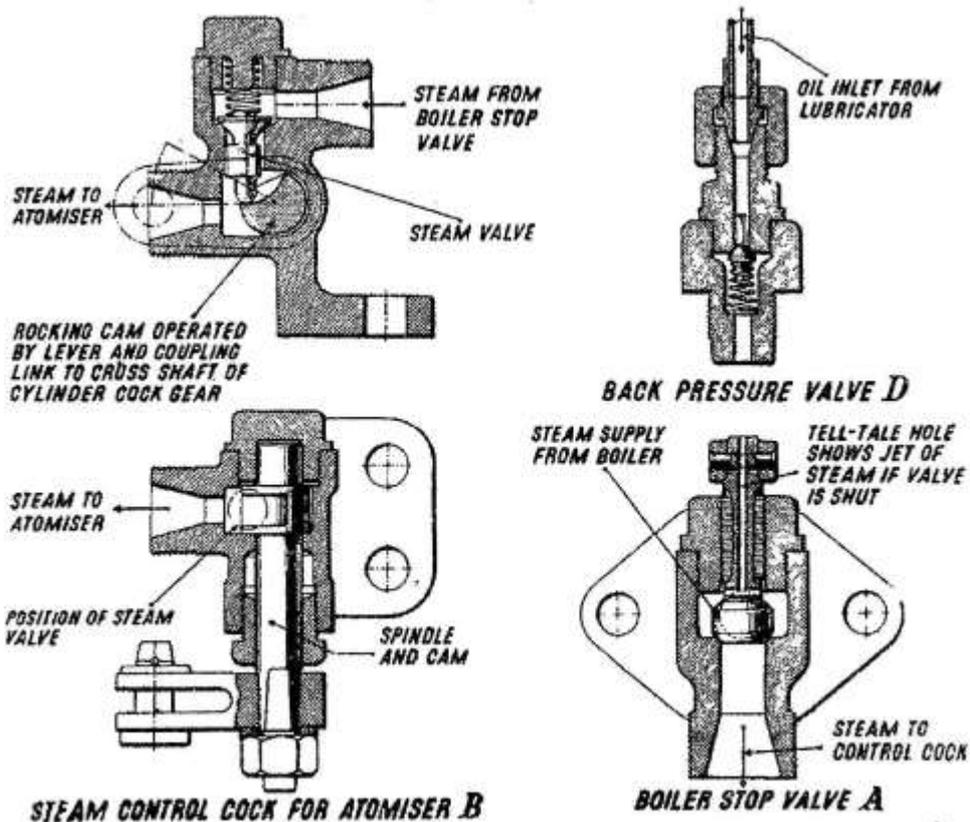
LMS Atomiser Steam Control Cock, Boiler Stop Valve and Back-Pressure Valve.
